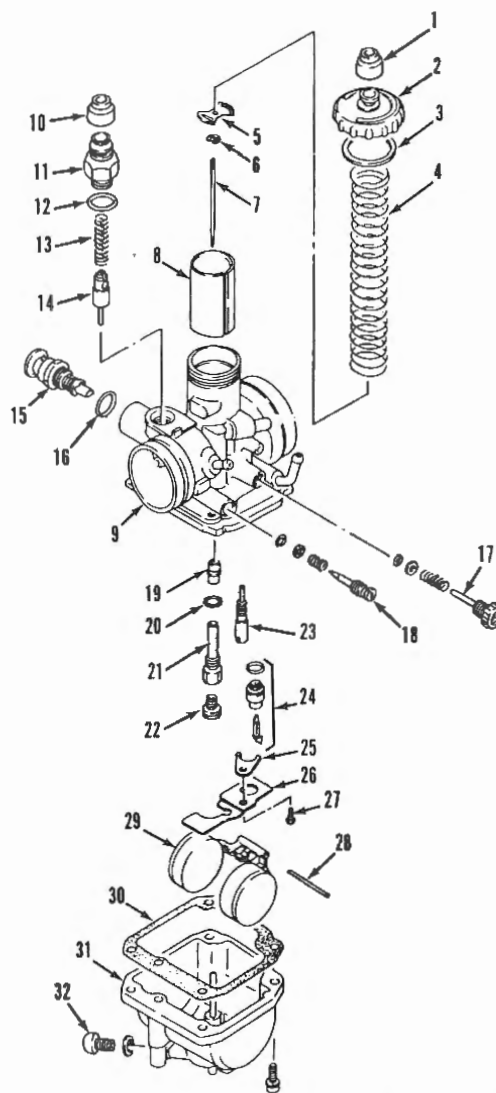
Exploded view of Mikuni VM24SS carburetor.
